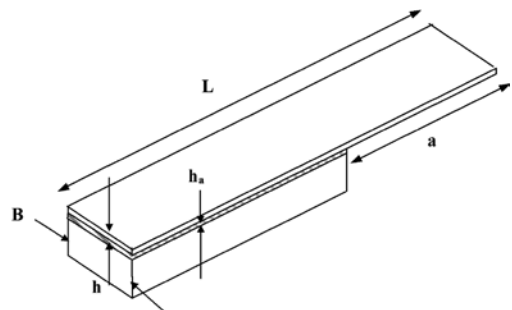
Fixed arm peel test specimen geometry. Where, a - crack length, distance between the load line and the tip of the crack, B - specimen width, h - arm thickness, h_a - adhesive layer thickness, L - specimen length.
